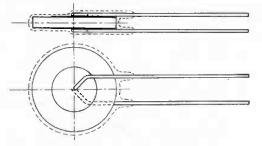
A: CROSS-SECTION OF MOLDED AXIAL PACKAGE
